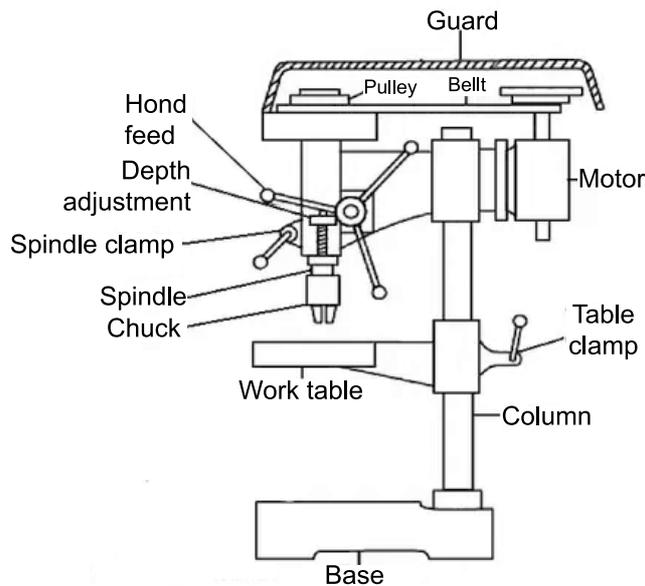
Drilling Machine (Source: learnmechanical.com)
